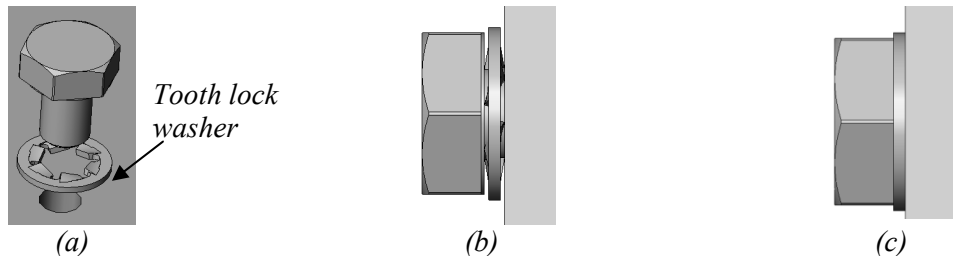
Different positioning constraints between a hexagonal screw, a tooth lock washer, and a hole (a) exploded view (b) screw and plate contact against the extremity vertices of the teeth (c) screw and plate interferences with the tooth lock washer.
